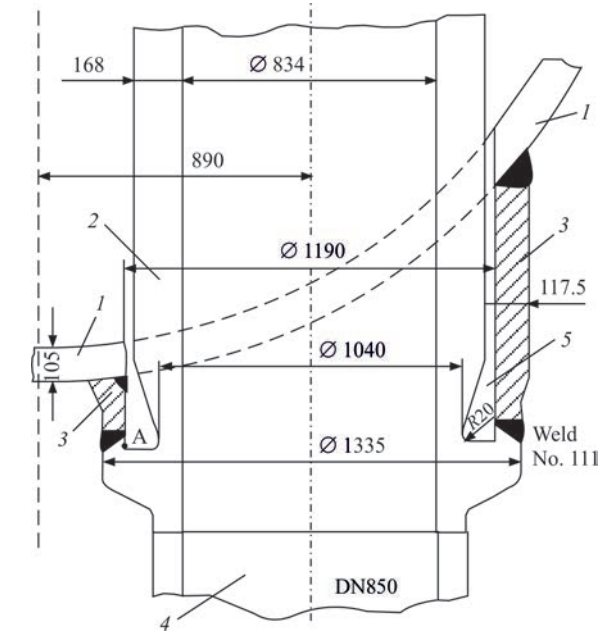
Layout of welded joint No. 111: 1 — steam generator case; 2 — collector; 3 — DN1200 nozzle; 4 — DN850 pipeline; 5 — pocket; A — discontinuity defect
